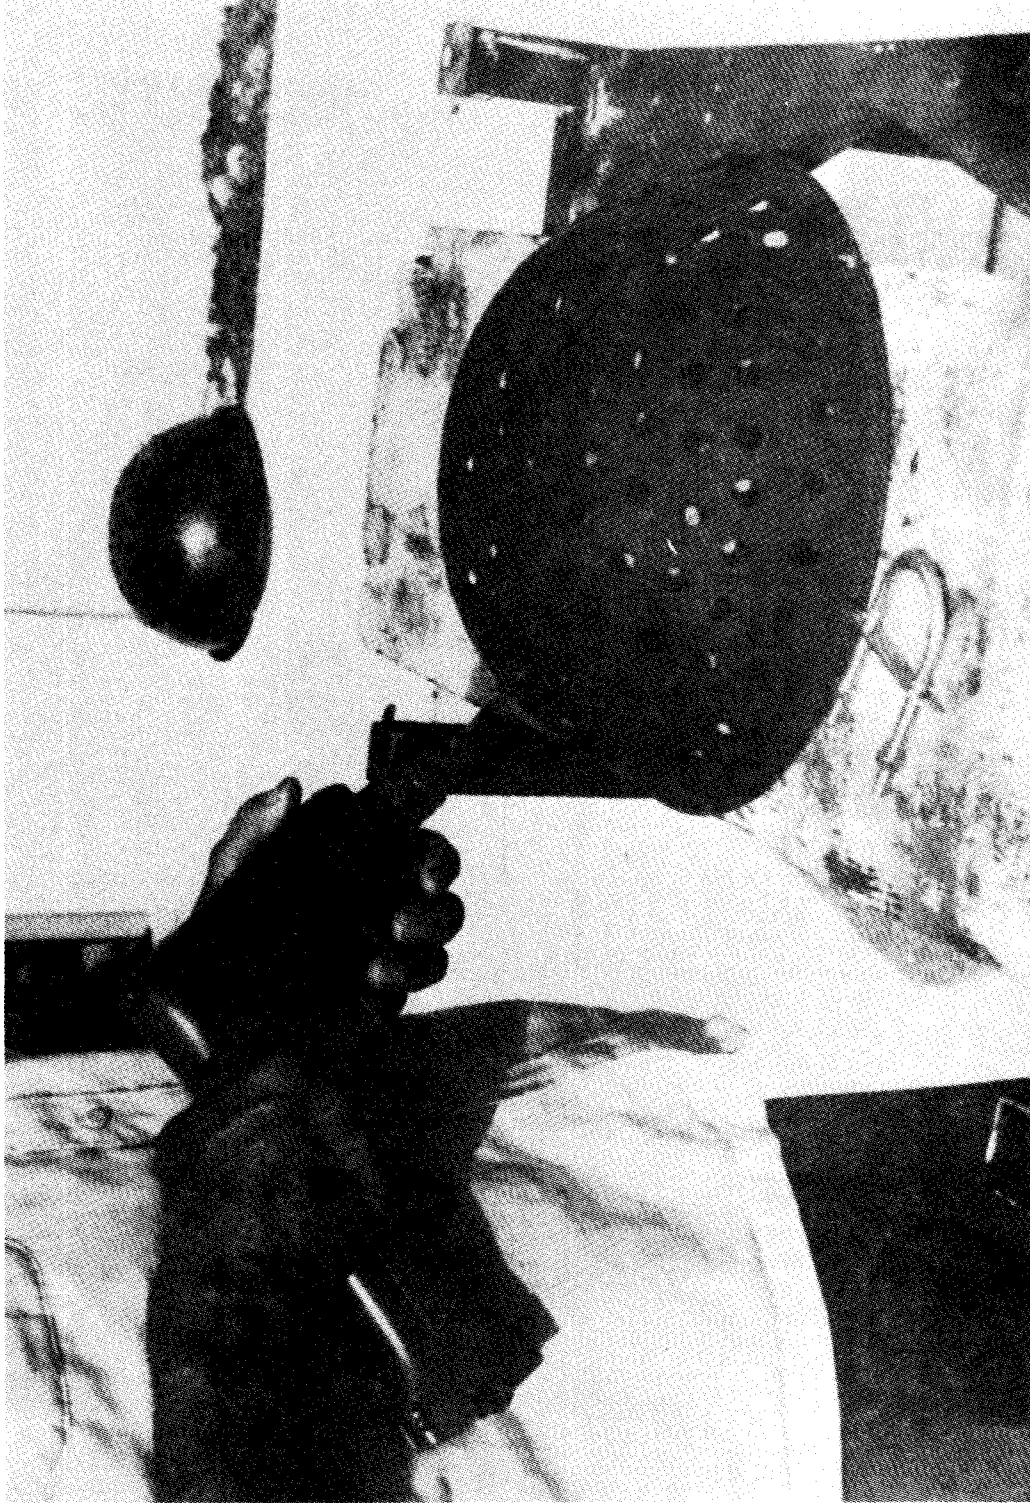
Drilling holes into the stainless steel mixing bowl to be used for the grate. Note the U-bolt in the foreground.
